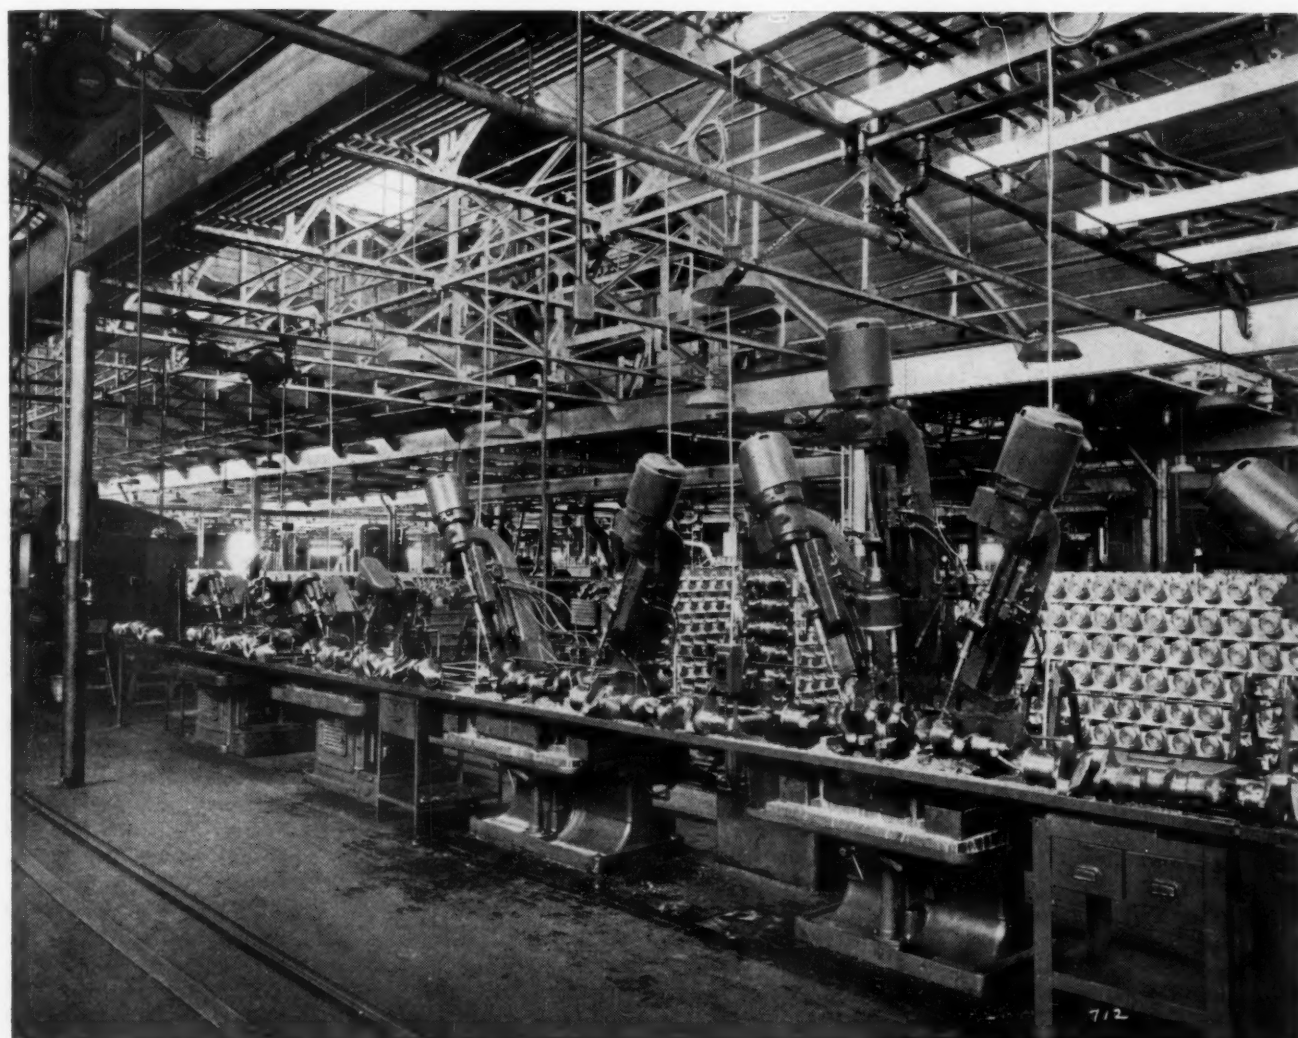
CRANKSHAFT LINE IN AN AUTOMOBILE FACTORY
